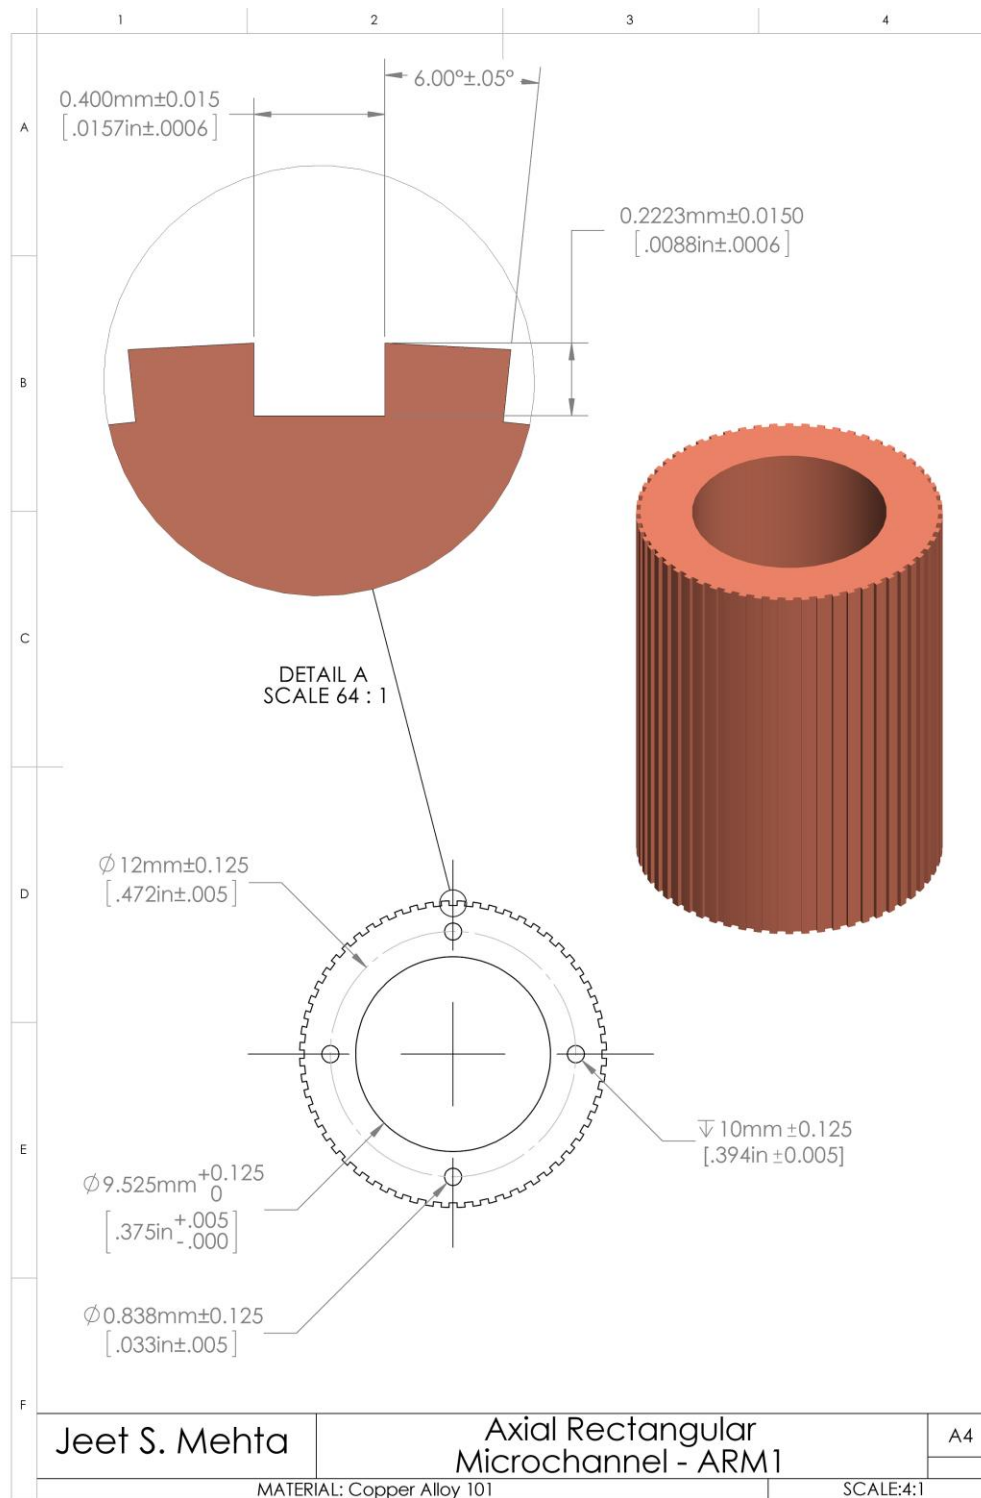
Technical drawing of the axial rectangular microchannel – ARM1 test section
